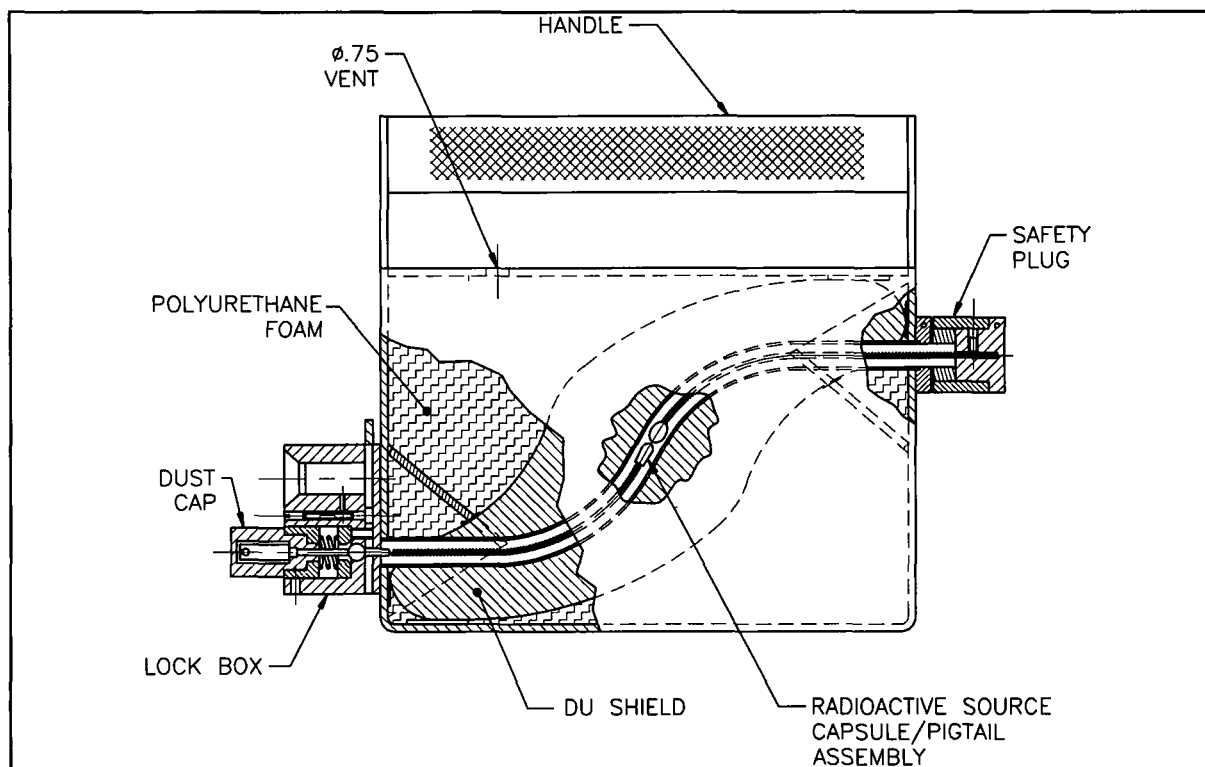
Sectional View of the IR-100 Exposure Device
